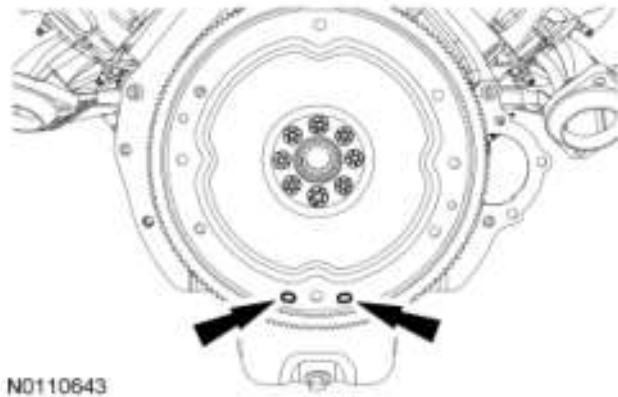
Aligning With Offset Hole On Crankshaft Ignition Pulse Ring With Offset Hole On Flexplate
